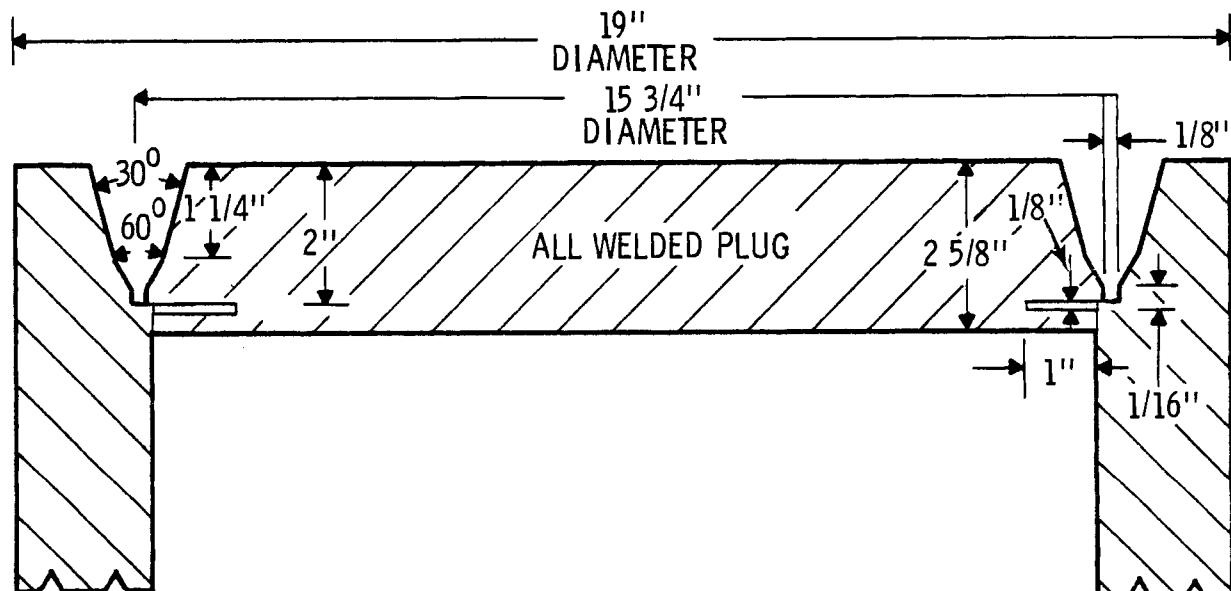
Full Penetration Weld for RSSF Cask
